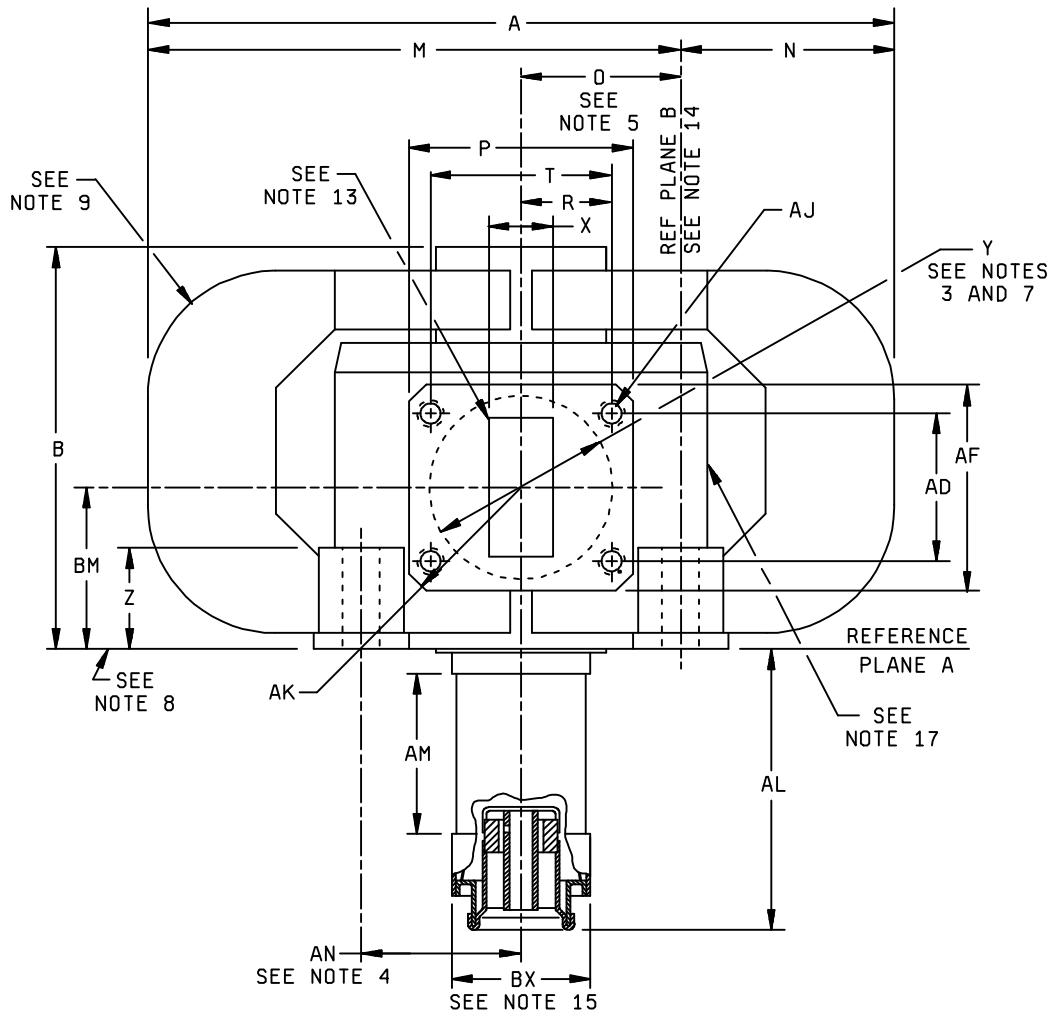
A. Alternate outline drawing of electron tube type DOD-042 (front view).
